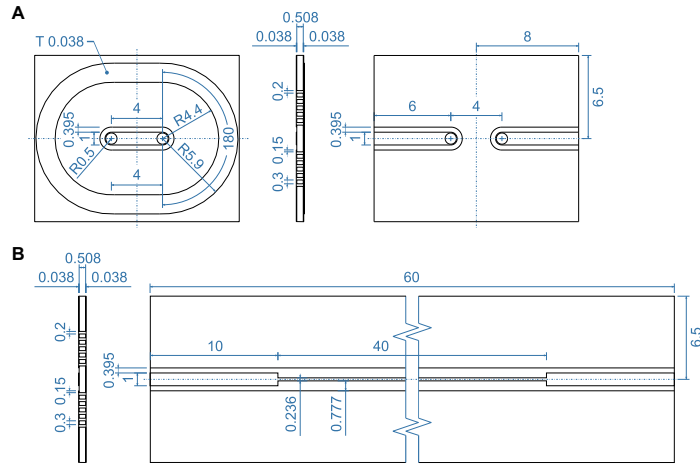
Drawing of our chip and Beatty line. A) Dimensions of our chip and B) Dimensions of Beatty line. Units mm
